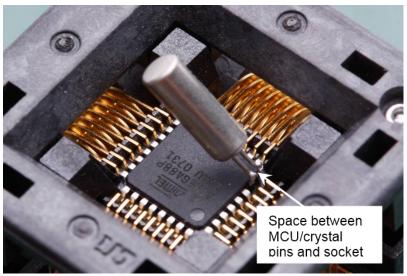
SMD Crystal Soldered Directly to MCU Using Pin Extensions
